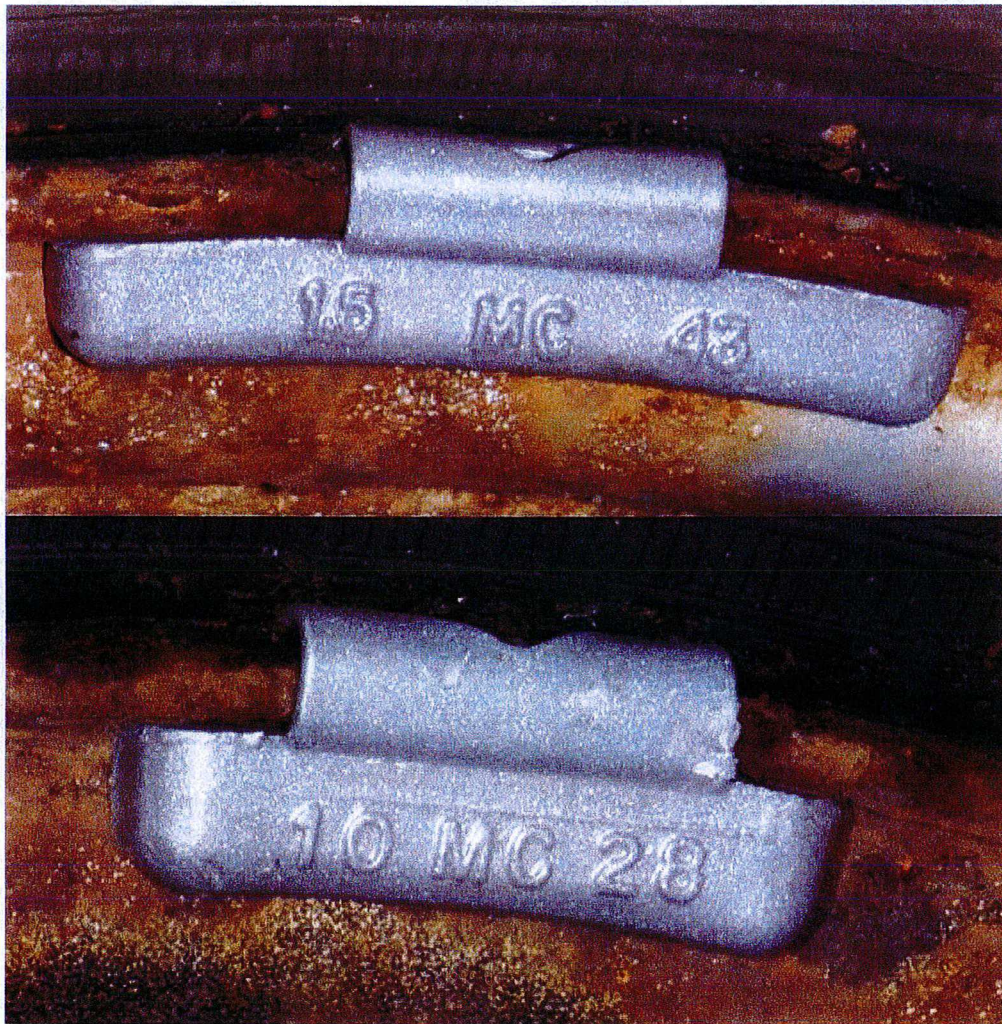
Wheel weights observed on the inspected wheel (top: front side of the wheel; bottom: rear side of the wheel).
